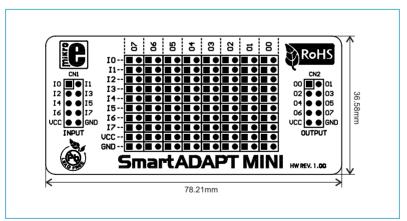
Dimensions of the Smart ADAPT MINI additional board
